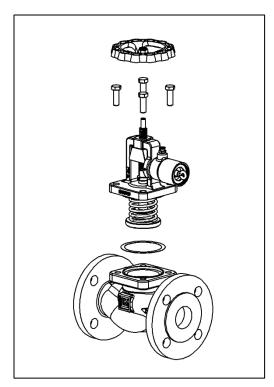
Disassemble bolts and handwheel to separate bonnet and body. Replace the old gasket with the new.
